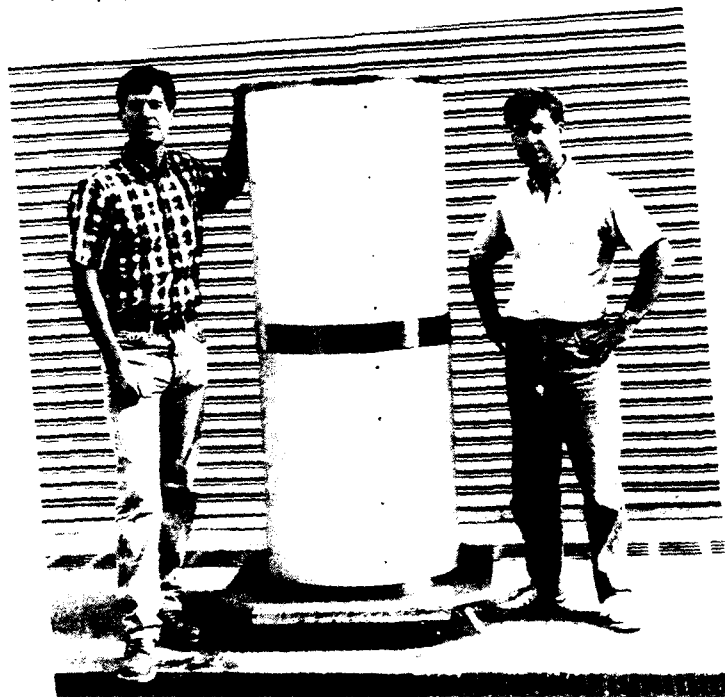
26-inch-housing cylindrical hull with external composite fairing.
